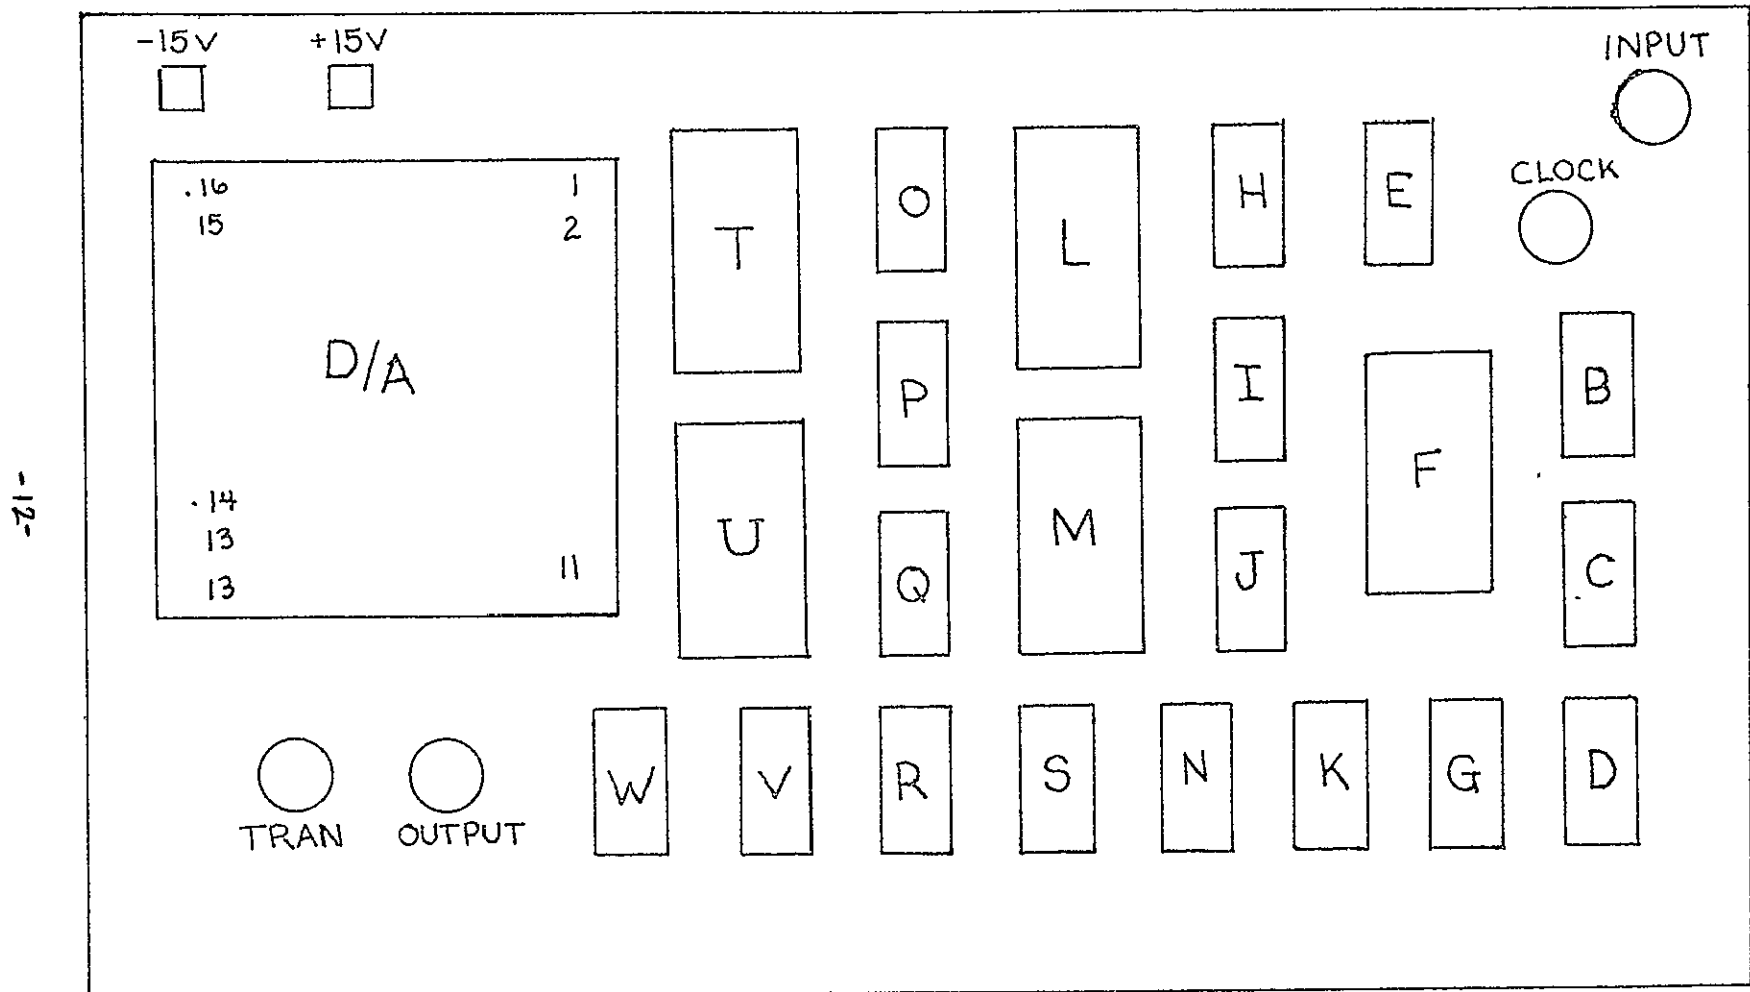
ONE DIMENSIONAL DELTA MOD RECEIVER
